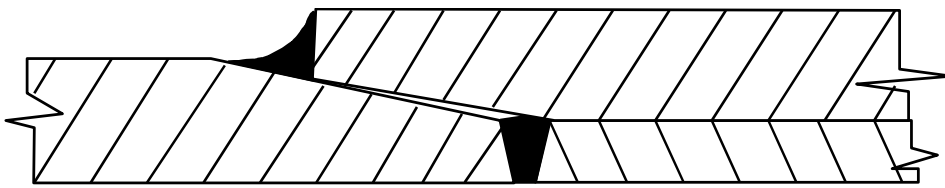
Section A-A: Extending the ice belt vertical with doublers. Welding detail
